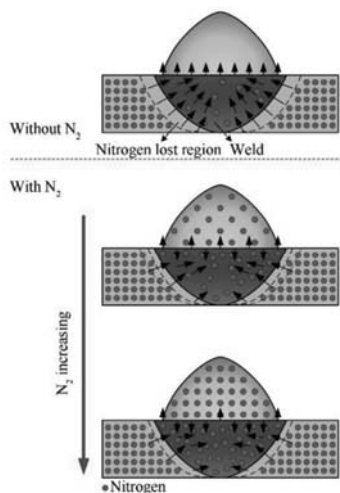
Schematic presentation of the welding with Ar and $Ar+N_2$ gas mixture [11]
